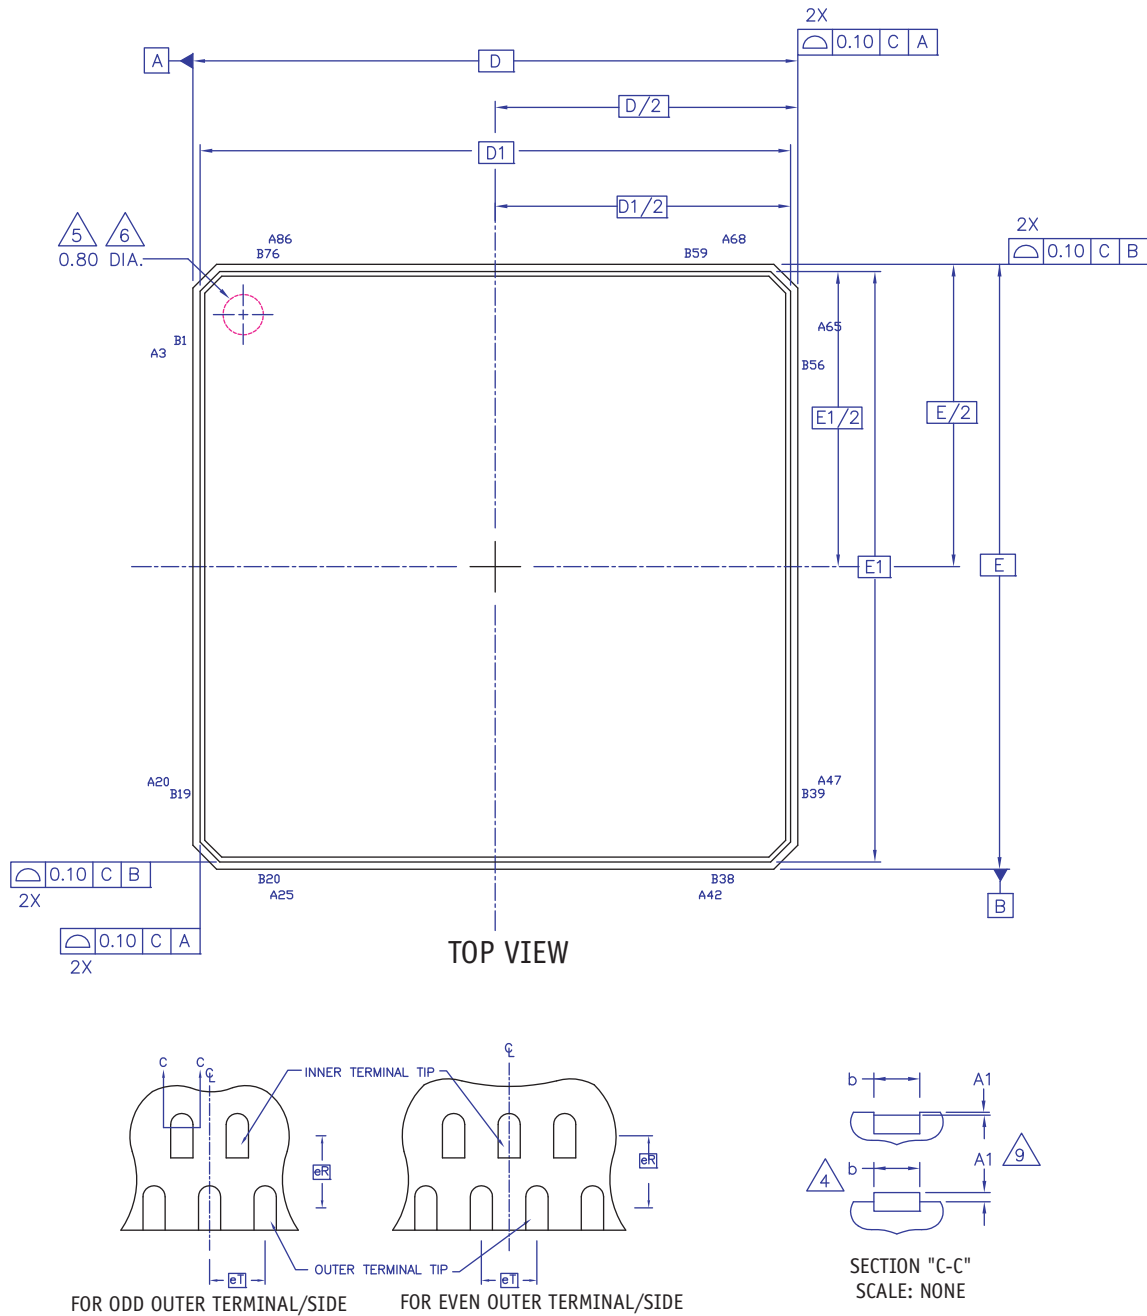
AR9331 Package Drawing: Top View and Detail
